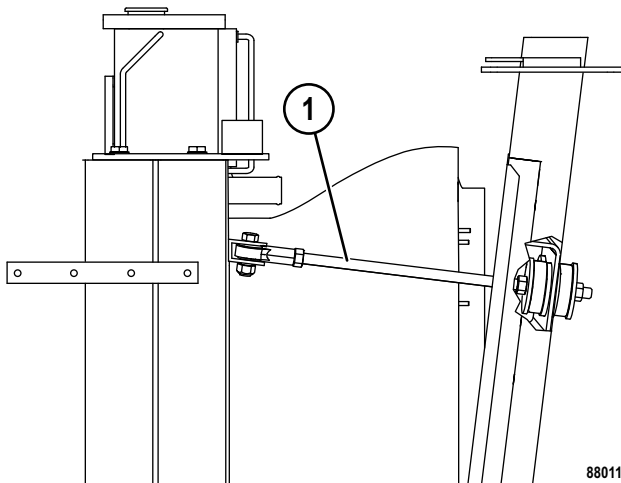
UPPER SUPPORT ROD REMOVAL
